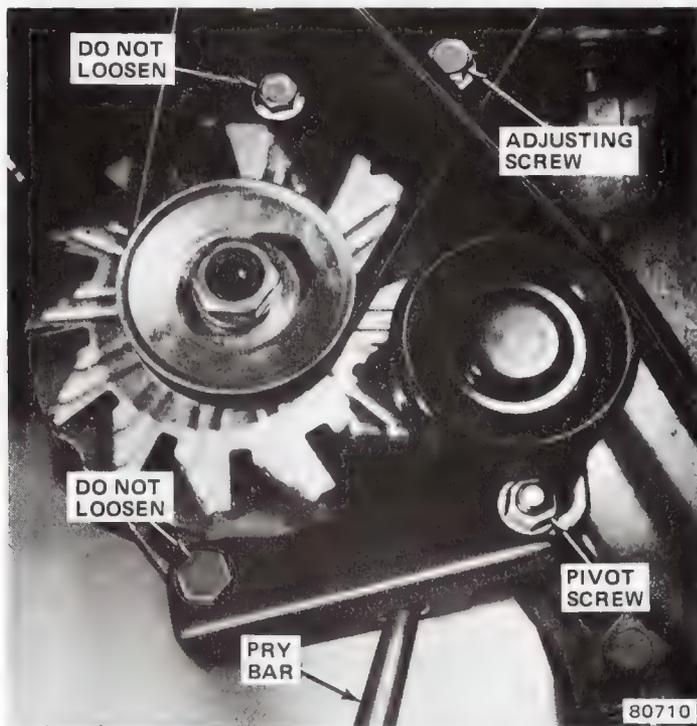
C-16 Alternator Adjustment—Six-Cylinder with Air Conditioning (Except Pacer)
